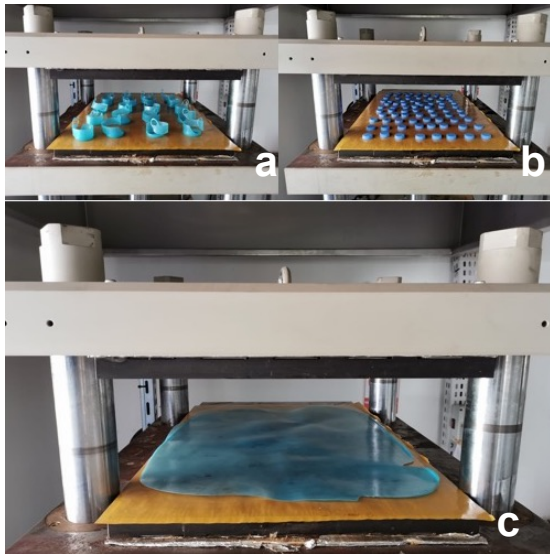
a. LDPE and b. HDPE bottle caps c. matrix plate
